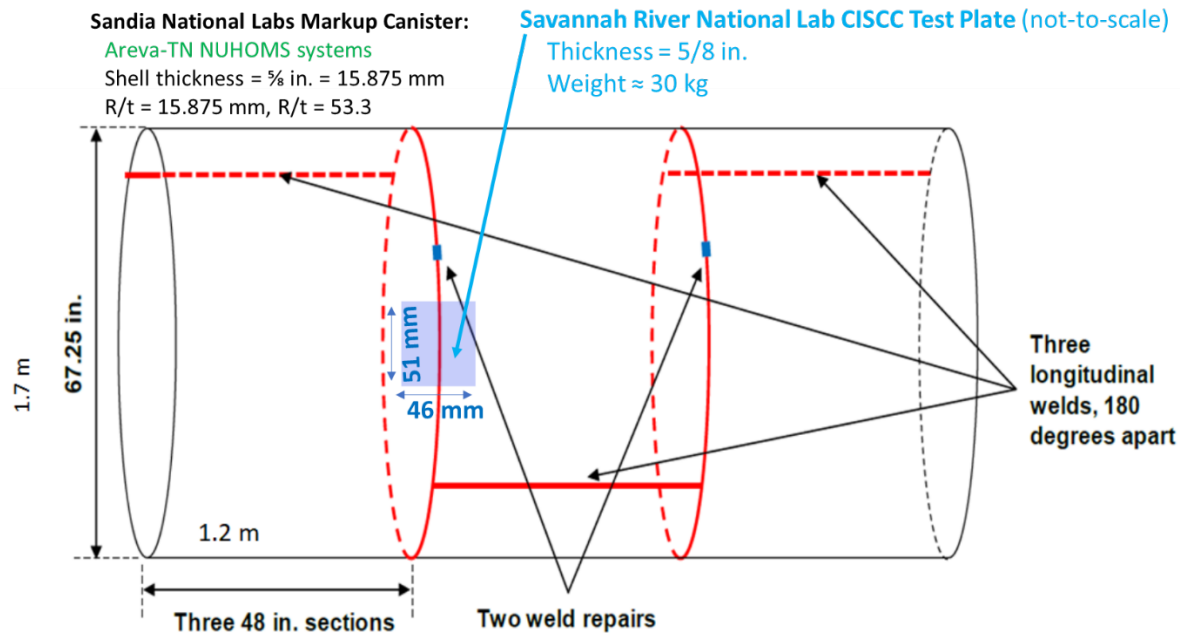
A sketch of the full size mockup canister showing the fabrication welds and the representative location where the SRNL large plate was harvested
